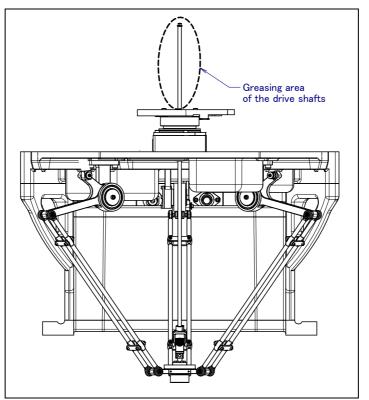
(b) Supply grease to J4 to J6 drive shafts (example of J4-axis)
